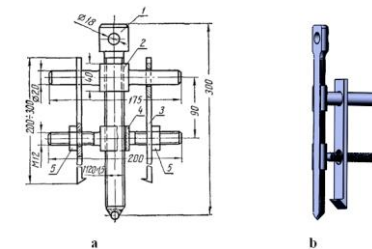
Tractor bearing stripper: a – assembly drawing [2]; b – 3D model
